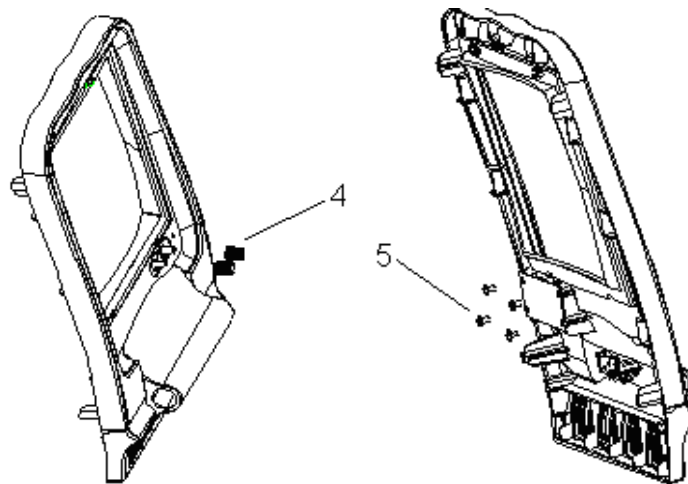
Sketch Map of CRT Adjustment Knob Disassembly
